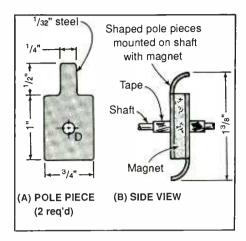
Machining details for pole pieces (A) and "sandwich" made up of two pole pieces and a magnet.
